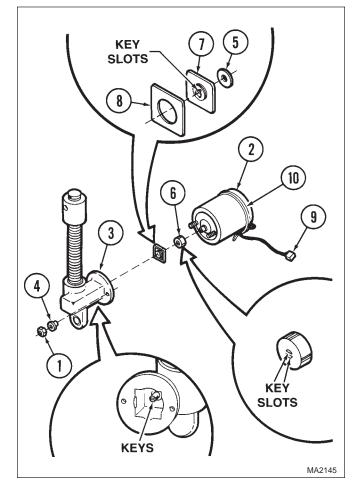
Trendelenburg Actuator Disassembly / Assembly
